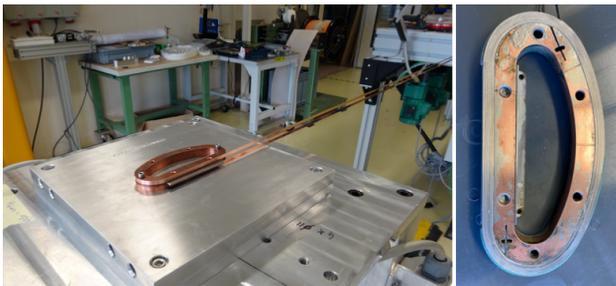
a) Winding of the first VR coil, b) The final coil after the soldering process.
